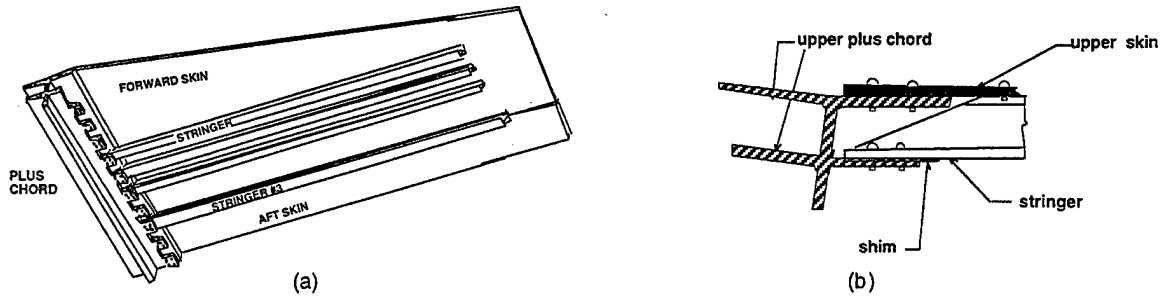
Example assembly (Airplane horizontal stabilizer upper skin assembly). This assembly is part of the horizontal stablizer shown in Figure 7-8.
